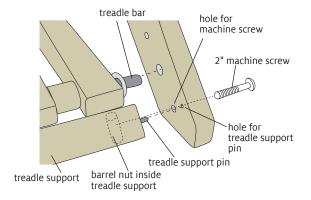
B - TREADLE ASSEMBLY HARDWARE
